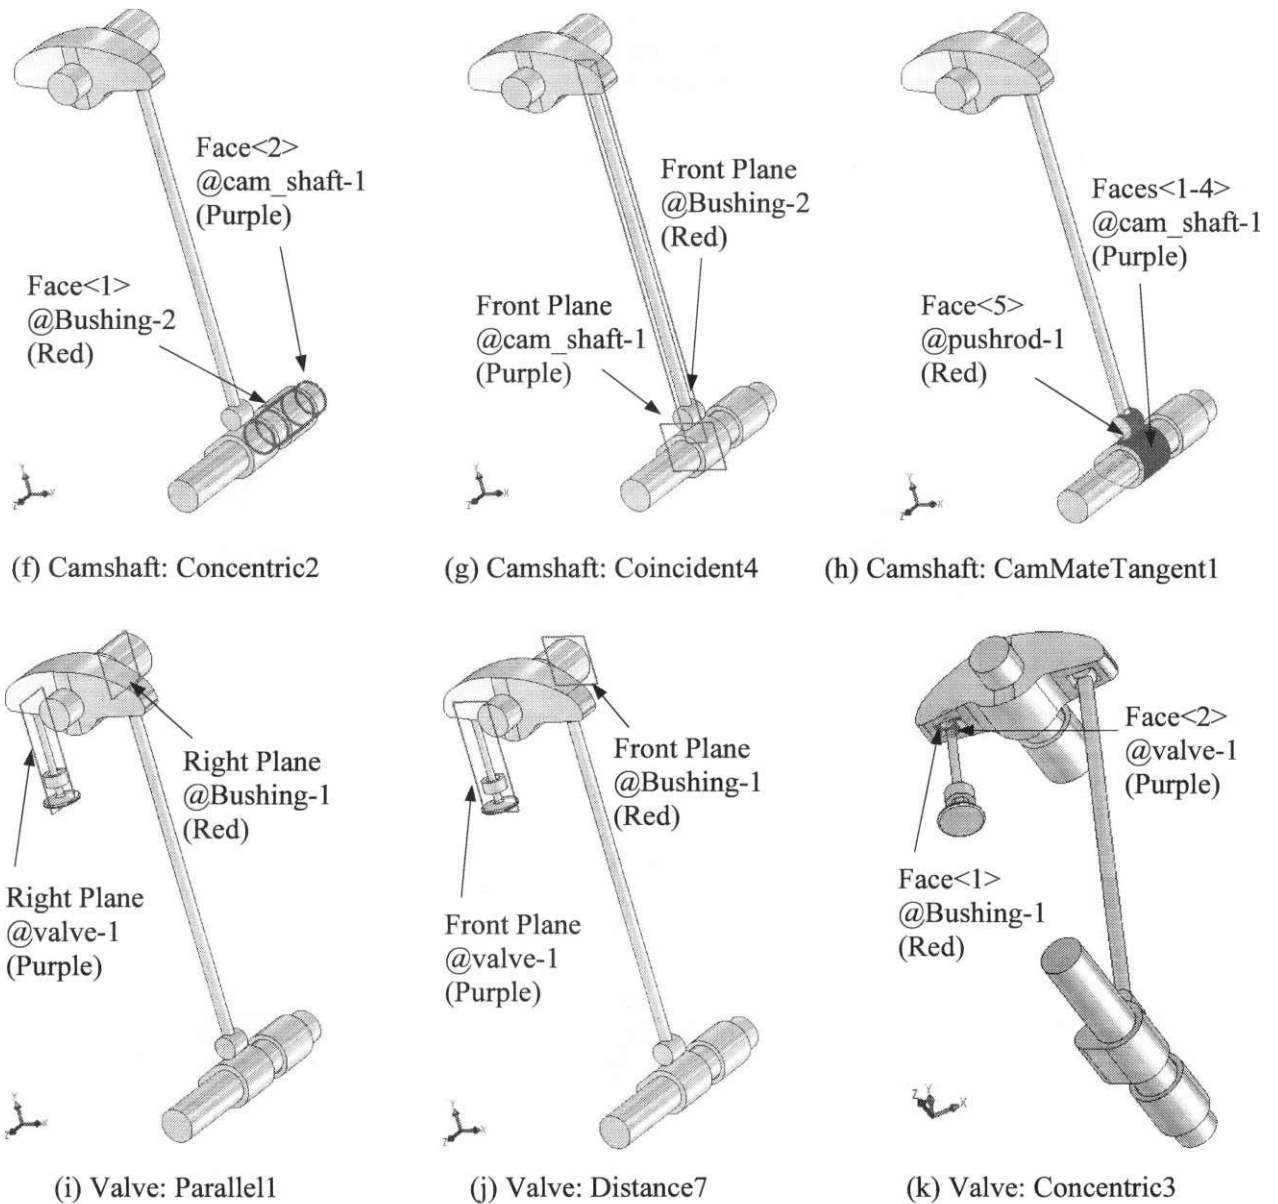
Assembly Mates Defined for the Mechanism (Cont'd)
